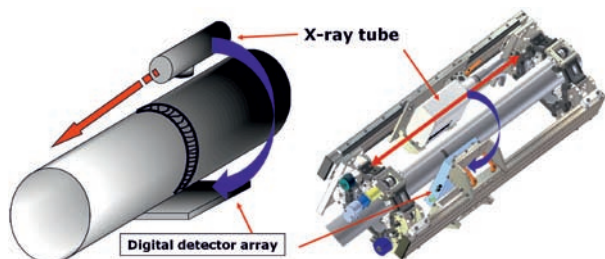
Tomoweld manipulator for 360° circumferential scan and laminographic inspection; scheme and photograph.
